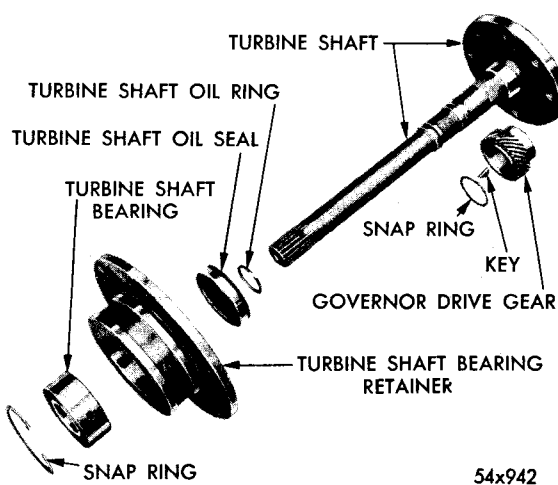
Turbine Shaft Assembly (Disassembled View)
